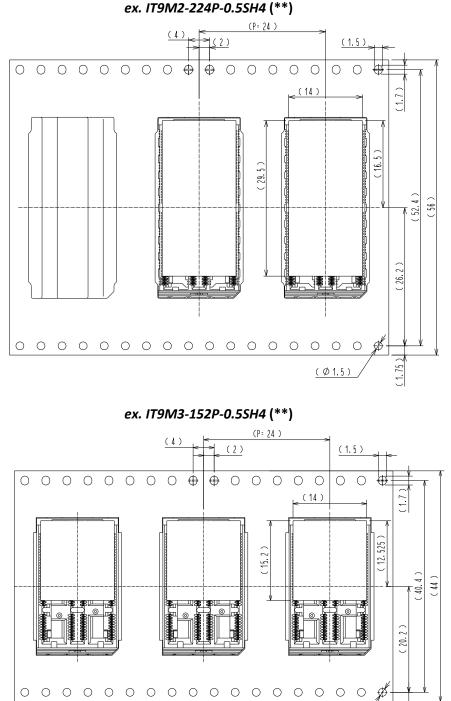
Embossed Carrier Tape for IT9 Receptacle (dimensions in mm)
